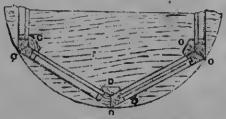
Part Horizontal Section of Bracket Cabinet.
